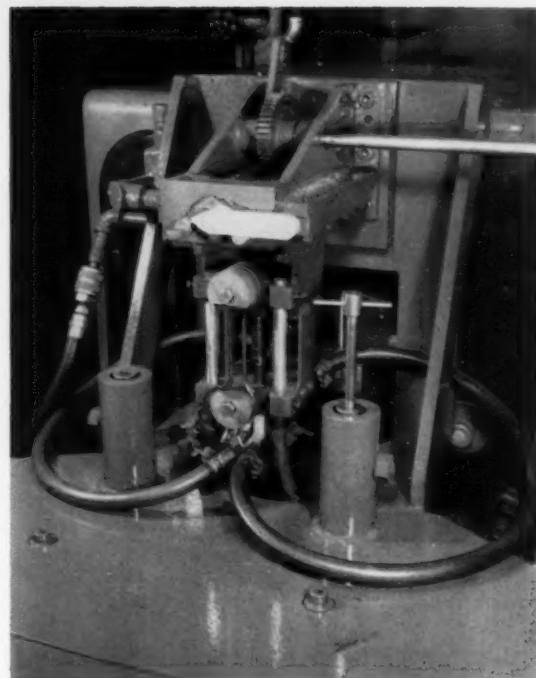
A view of the coil arrangement with work piece removed. See text for details of construction.
